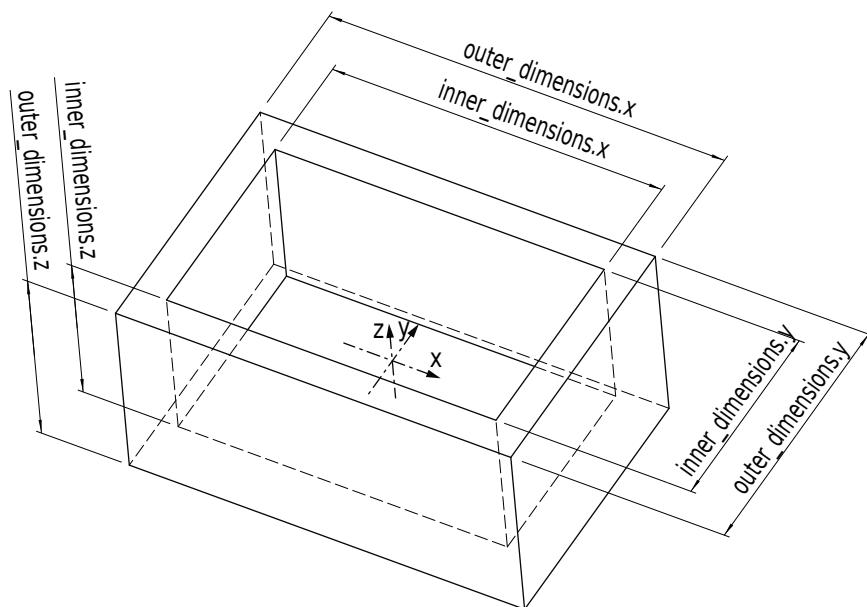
Load carrier with reference frame and inner and outer dimensions
